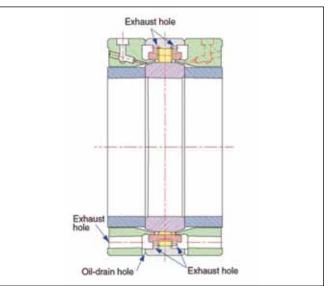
Oil-drain/hole-structure, NU-type cylindrical roller bearing.
